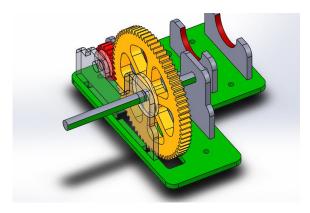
Isometric view of gearbox showing slot for drive gear in gearbox base (green).
